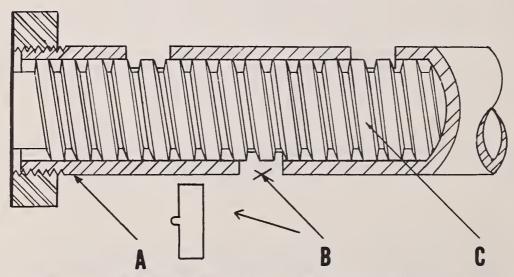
Section of auger and slotted tube showing: (A) 24 ST aluminum tubing 1 1/4 inch OD 1/8 inch wall; (B) slots 9/16 inch wide and 1/4 inch deep with 1/4 inch notch cut on feeding edge to minimize pulsing in delivery; and (C) cold-rolled steel auger with an acme 1 inch 4P thread. Distance between adjacent slots on upper and lower sides is 2 1/4 inches center to center. Distance between upper and adjacent lower slot is 1 1/8 inch center to center.
